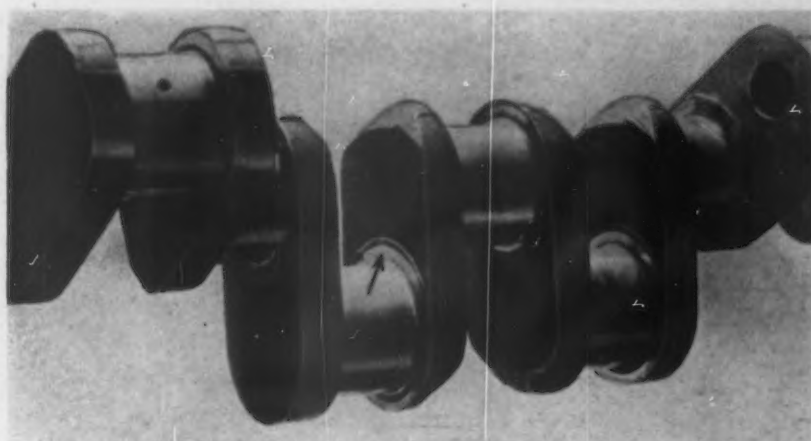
Fatigue cracks found by the Magnaflux method in a crankshaft which had been removed from service for routine inspection.
